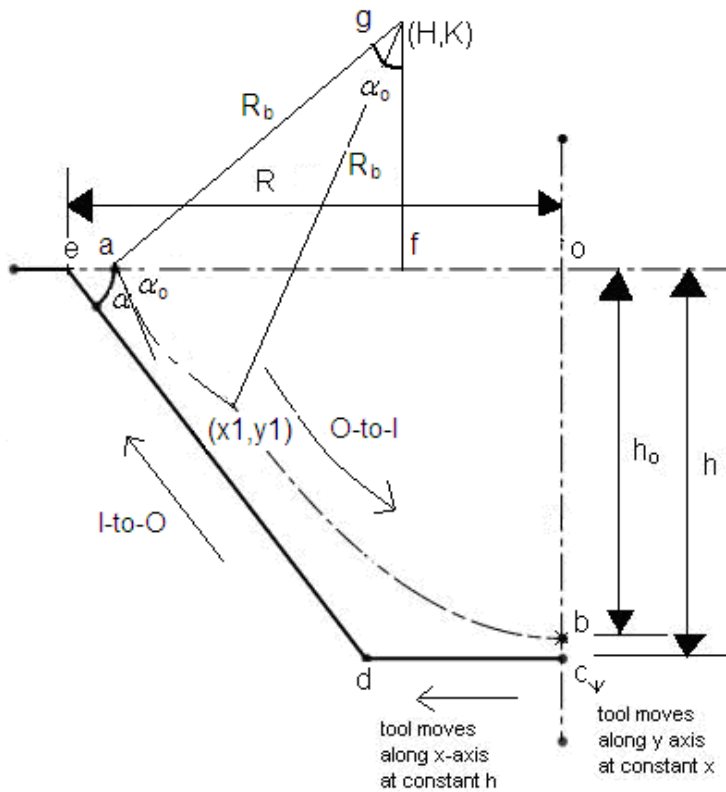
Sectional view to show *O-to-I* and *I-to-O* toolpath for top fillet Parabola type intermediate profile
